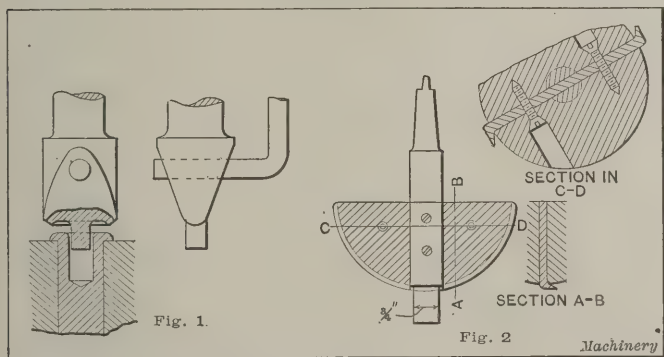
A Pneumatic Beading Tool. Fig. 2. A Pneumatic Wood-cutting Tool
